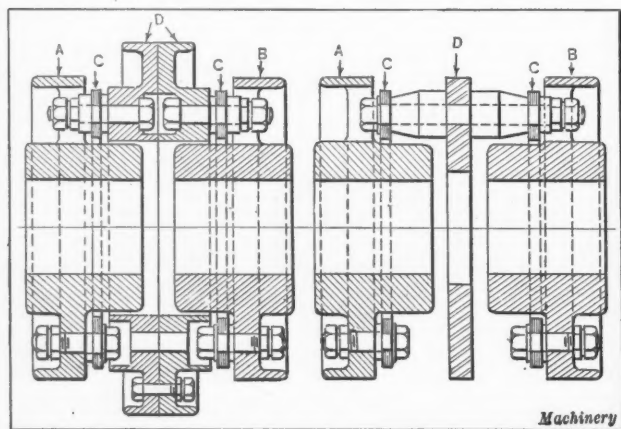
Floating Type with Steel Disks which have Six-point Drive
